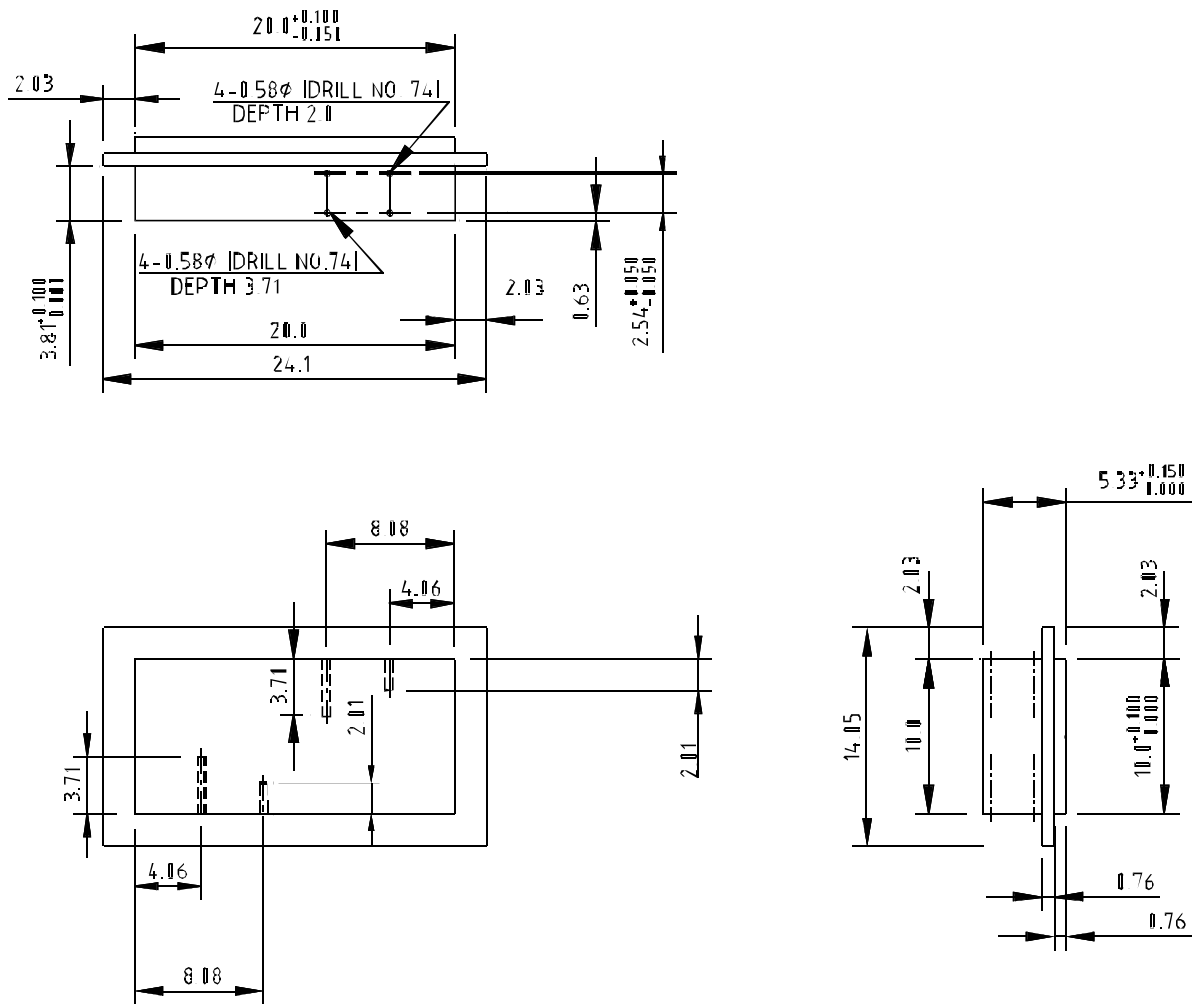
Heater plate with thermocouple holes (dimensions in mm).
